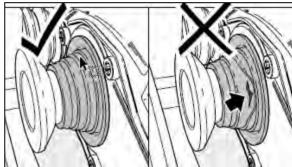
CHECK RUBBER BOOTS FOR DAMAGE
